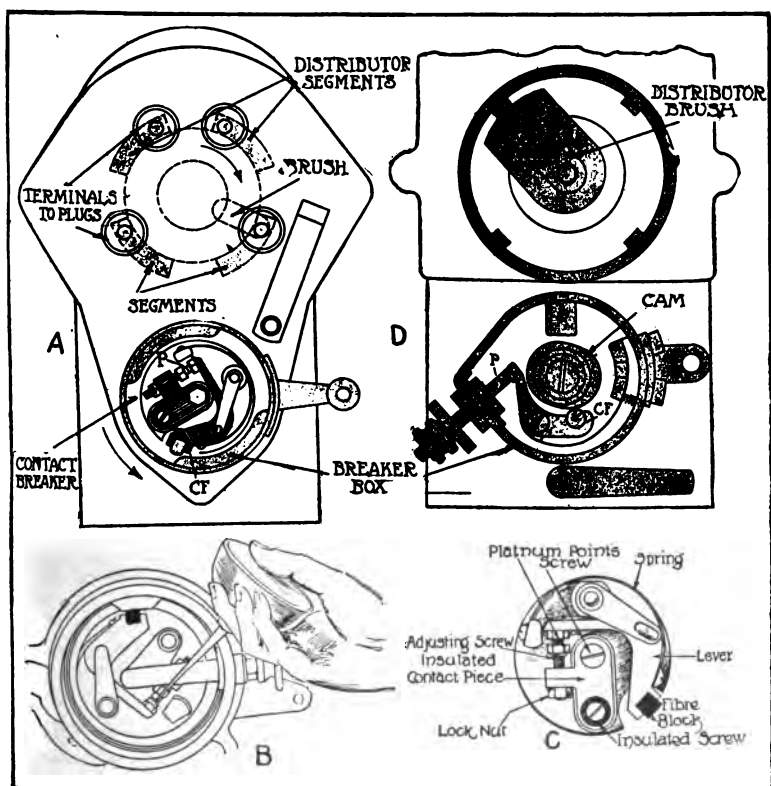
Construction of Bosch Contact Breaker Made Clear at A. B—How to Clean Contact Breaker Points. C—Bosch Contact Breaker Assembly Removed from Armature. D—The Remy Contact Breaker.
